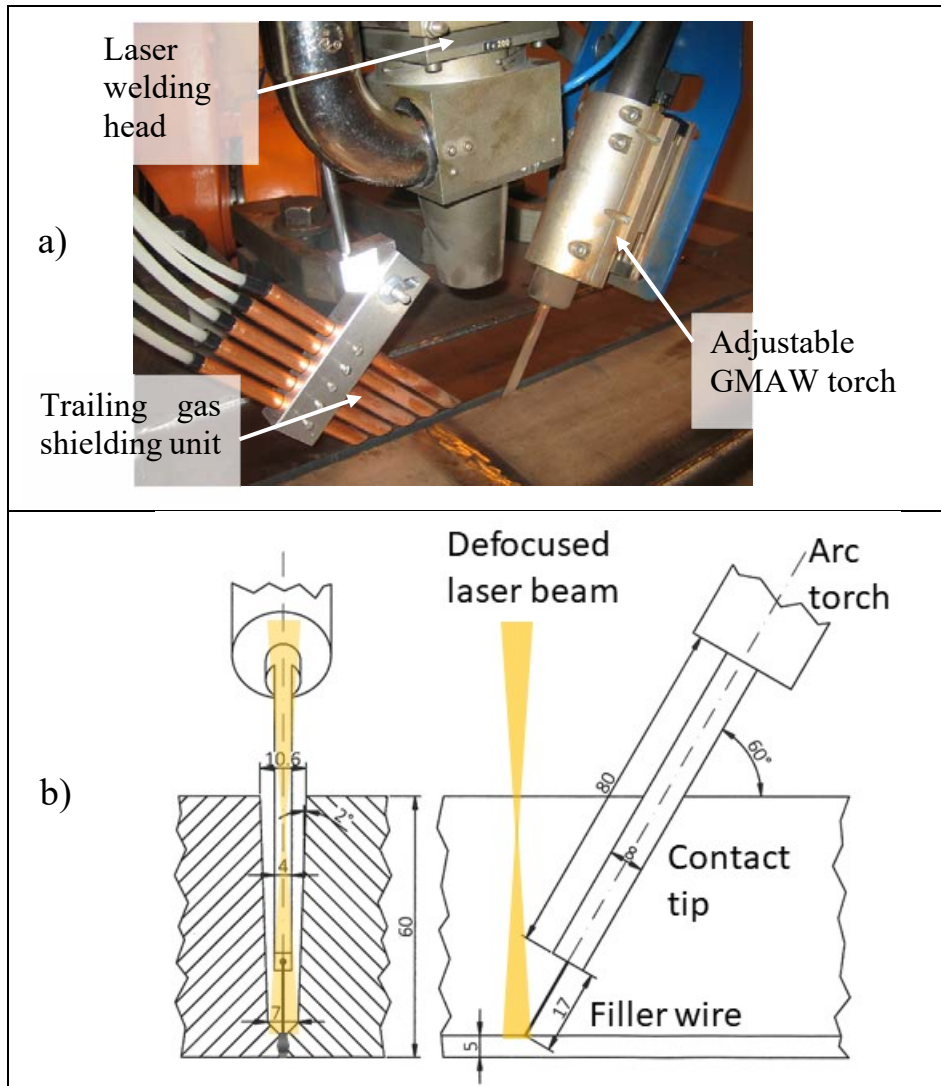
(a) Welding head set-up used in multi-pass laser-arc hybrid experiments. (b) Drawing presenting the principle of configuration used for the filling passes of multi-pass laser-arc hybrid welding with defocusing technique.
